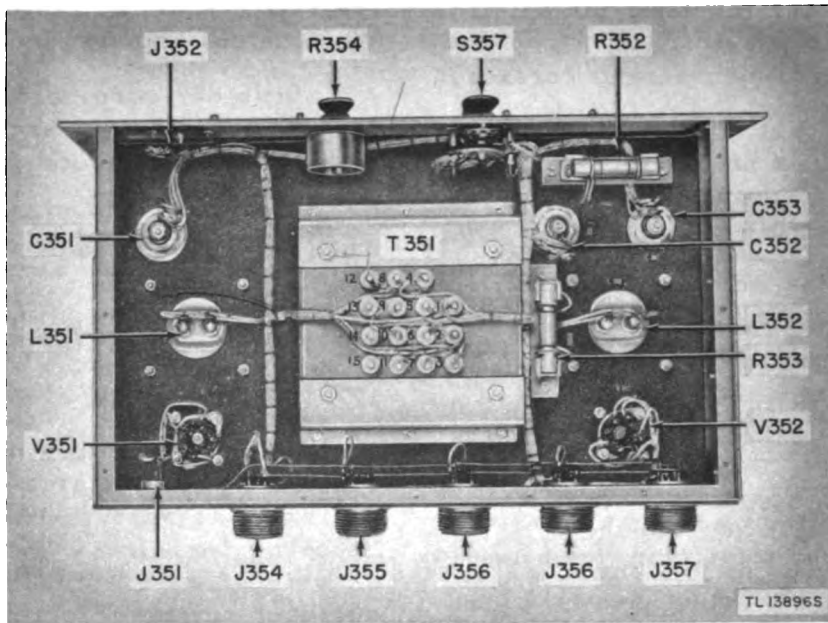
Control-Rectifier Power Unit PP-135/CRD-3, bottom view showing parts location.
